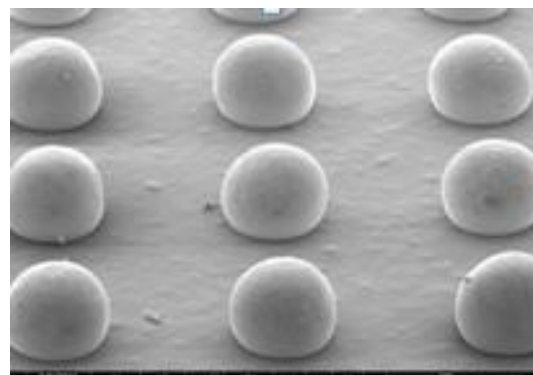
The picture of bumped dummy BGA using SJE Adhesive
